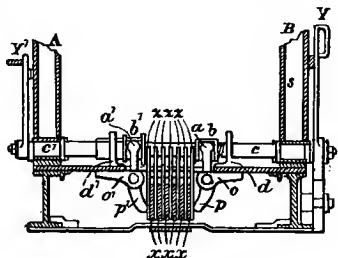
CROSS SECTION OF CARRIAGE SHOWING ELSWICK PLATE COMPRESSOR.
